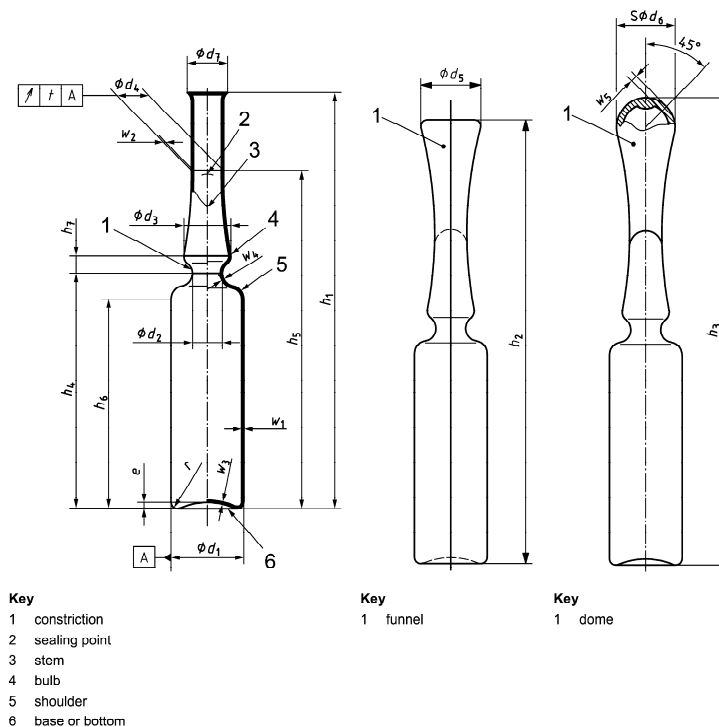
Dimensions of ampoule type B according to ISO 9187-1.
